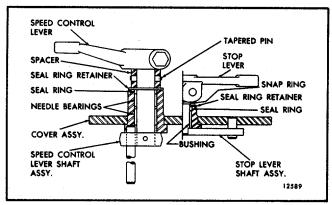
Cross Section of Former Design Governor Cover (other than Fuel Squeezer Engines)
